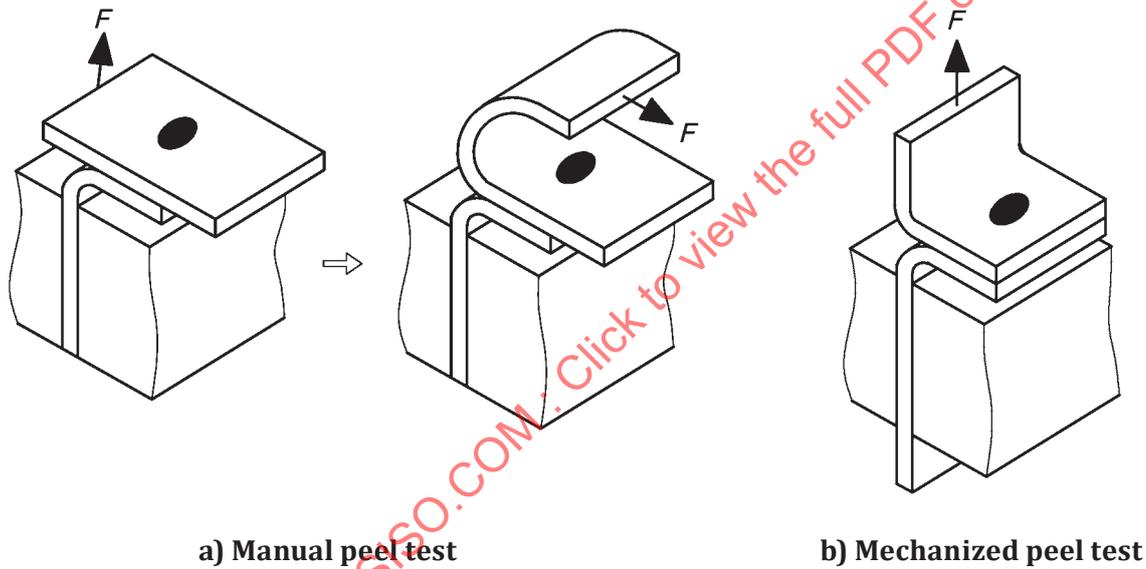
Peel testing of resistance spot and projection welded joints
